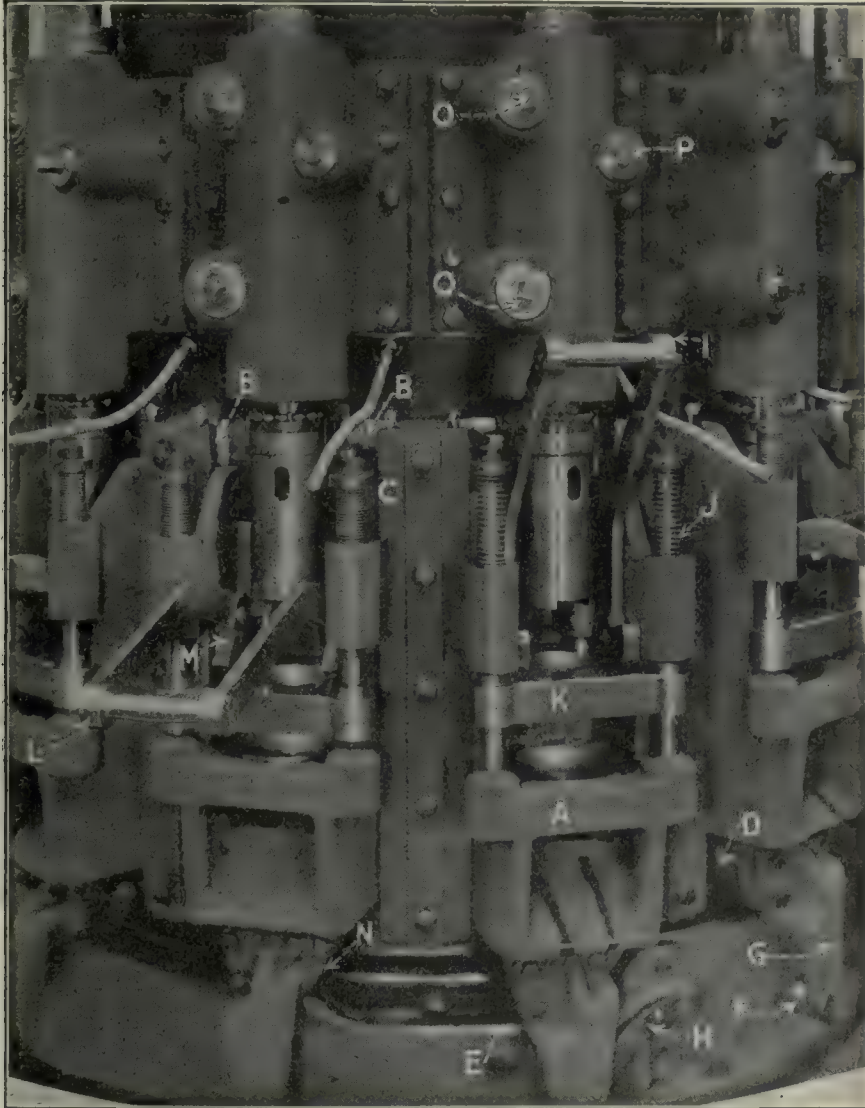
THE WORK-HOLDING FIXTURES AND DRILLING SPINDLES
